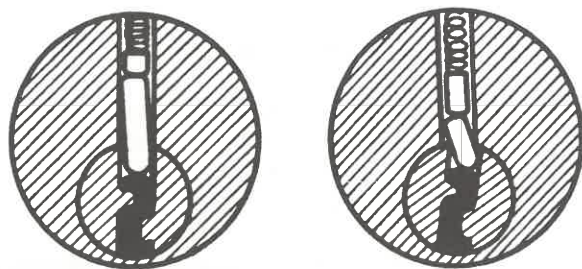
Long Pin Does Not Tilt Much. Produces Mark at Center of Key Blank Bit
